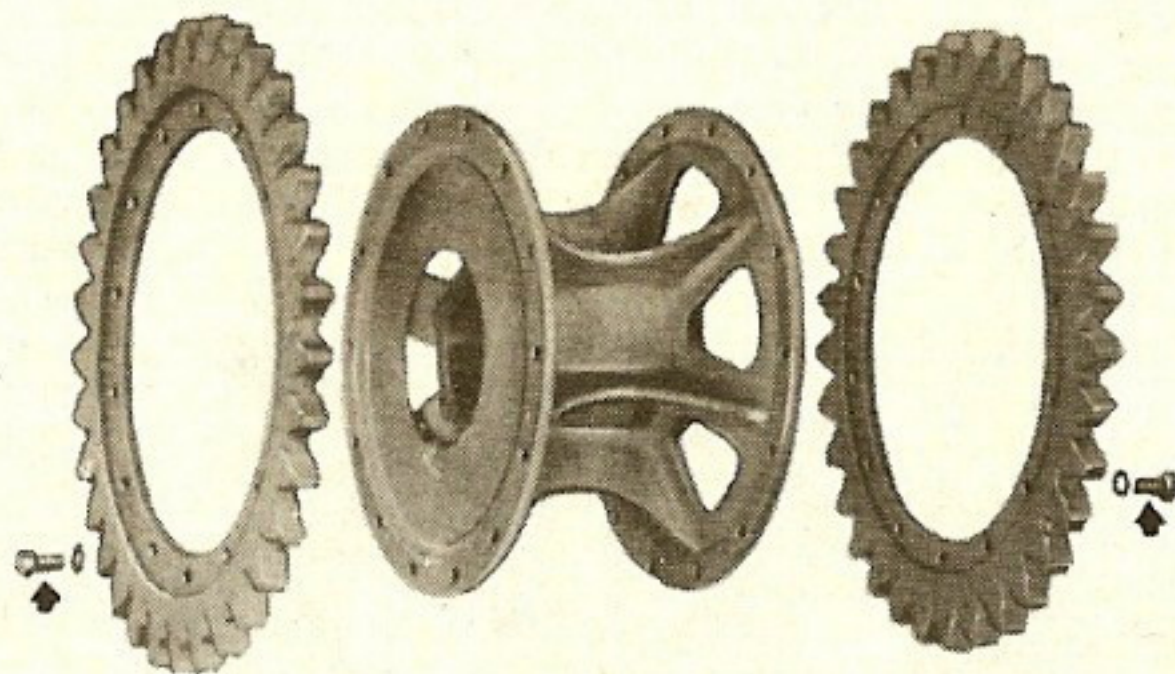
Convert all the sprocket-to-hub capscrews into rivets to keep the sprocket on the hub.
